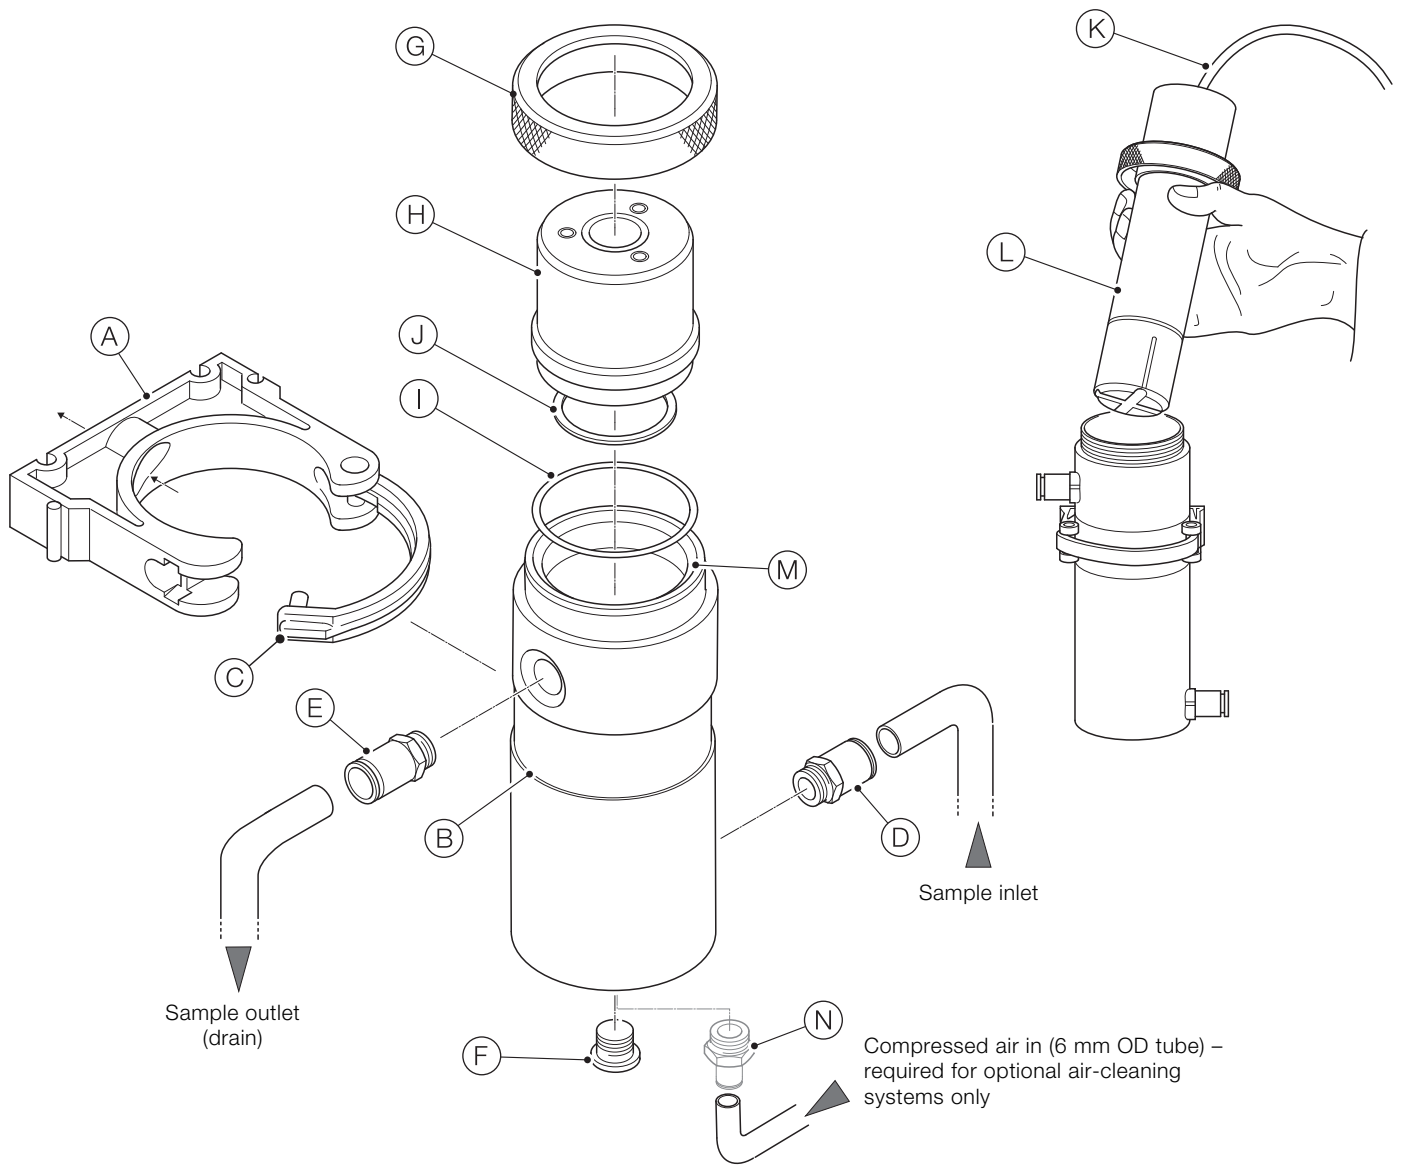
ADS430160 flowcell pipeline mounting assembly – installation
